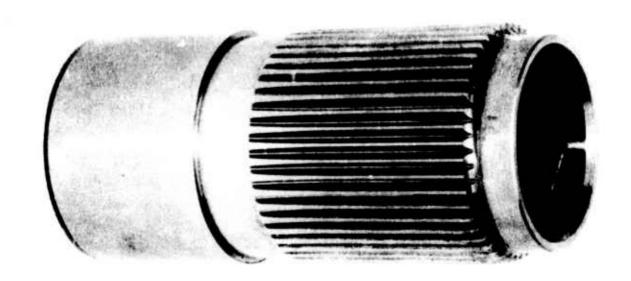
One Piece Fuel Pump Drive Gear; Replaces Three Spacers and Gear.
